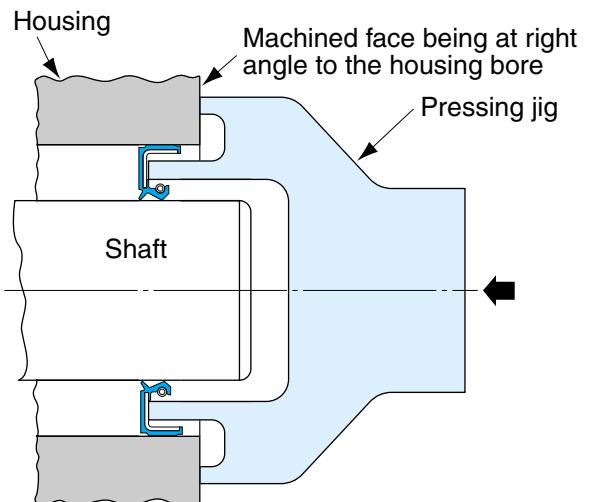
Seal press-fitting jig for straight housing bore
